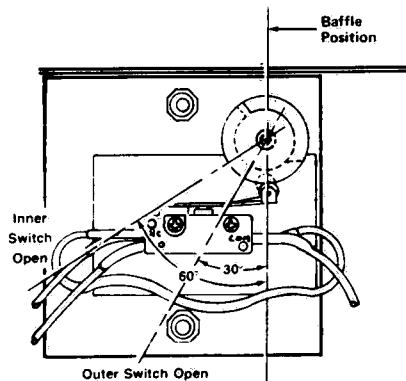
ICE FLAKER BAFFLE ASSEMBLY.
